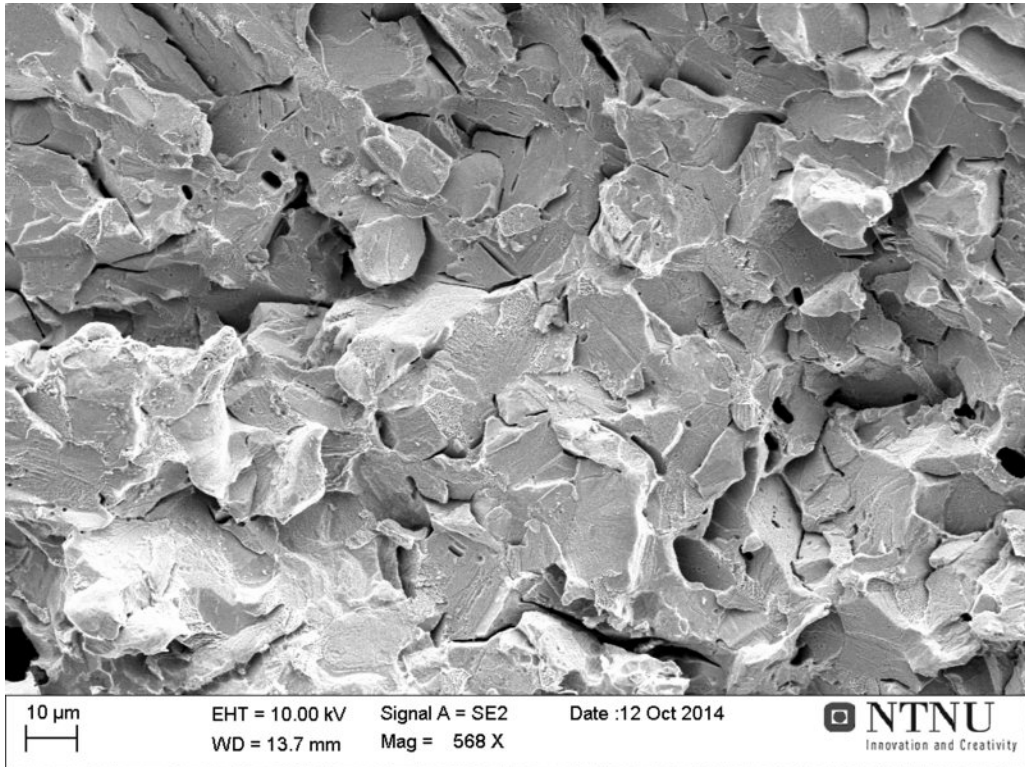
Fracture surface of specimen 2-6 viewed from the side. The rolling direction is perpendicular to the fracture surface.
